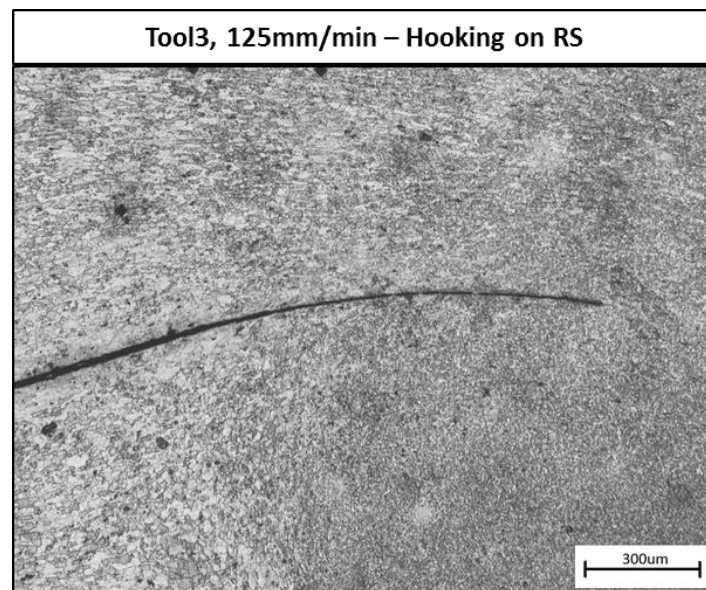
Image of the hooking flaw as seen on the retreating side of the similar AA7075/AA7075 FSW made under welding conditions of Tool3-125mm/min
